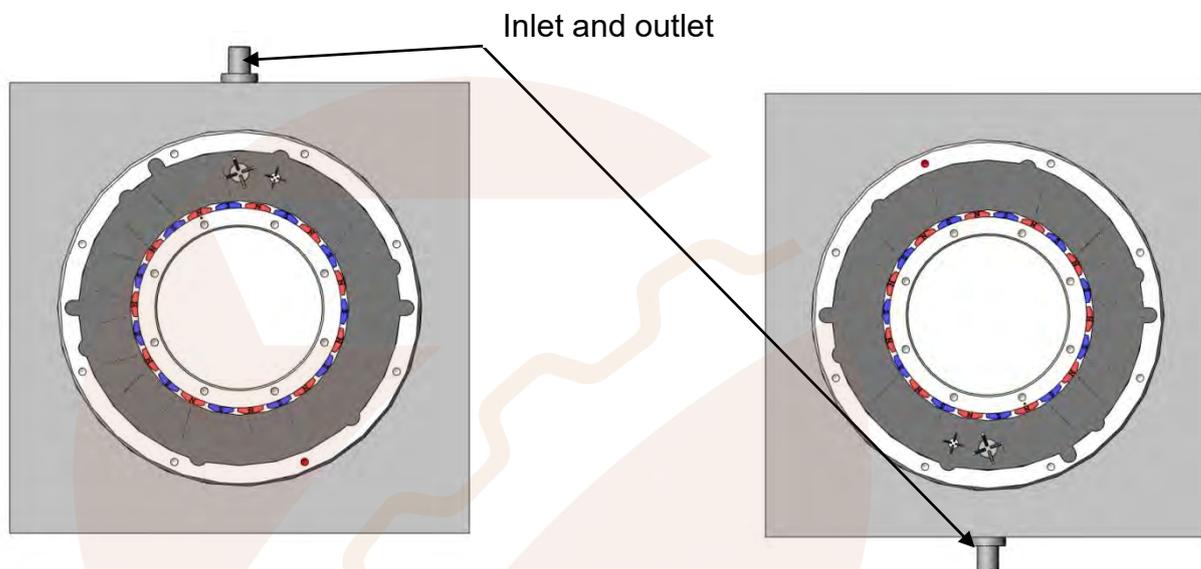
Coolant inlet/outlet position when mounted vertically
